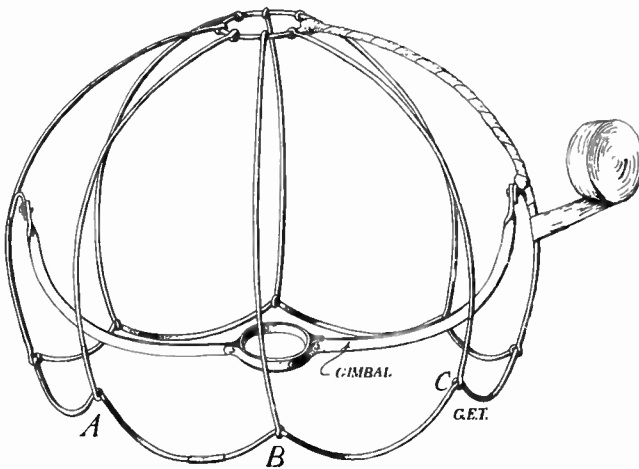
DETAILS FOR MAKING THE WIRE FRAME.
